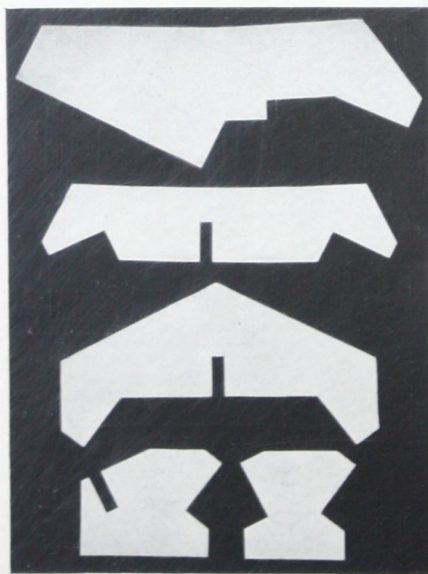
Typical insert plate templates for a truss composed of structural steel members
